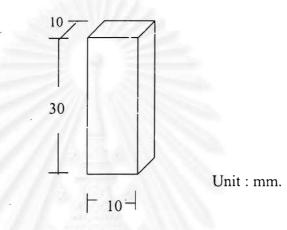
Dimension of compression parallel to grain testing specimen.
